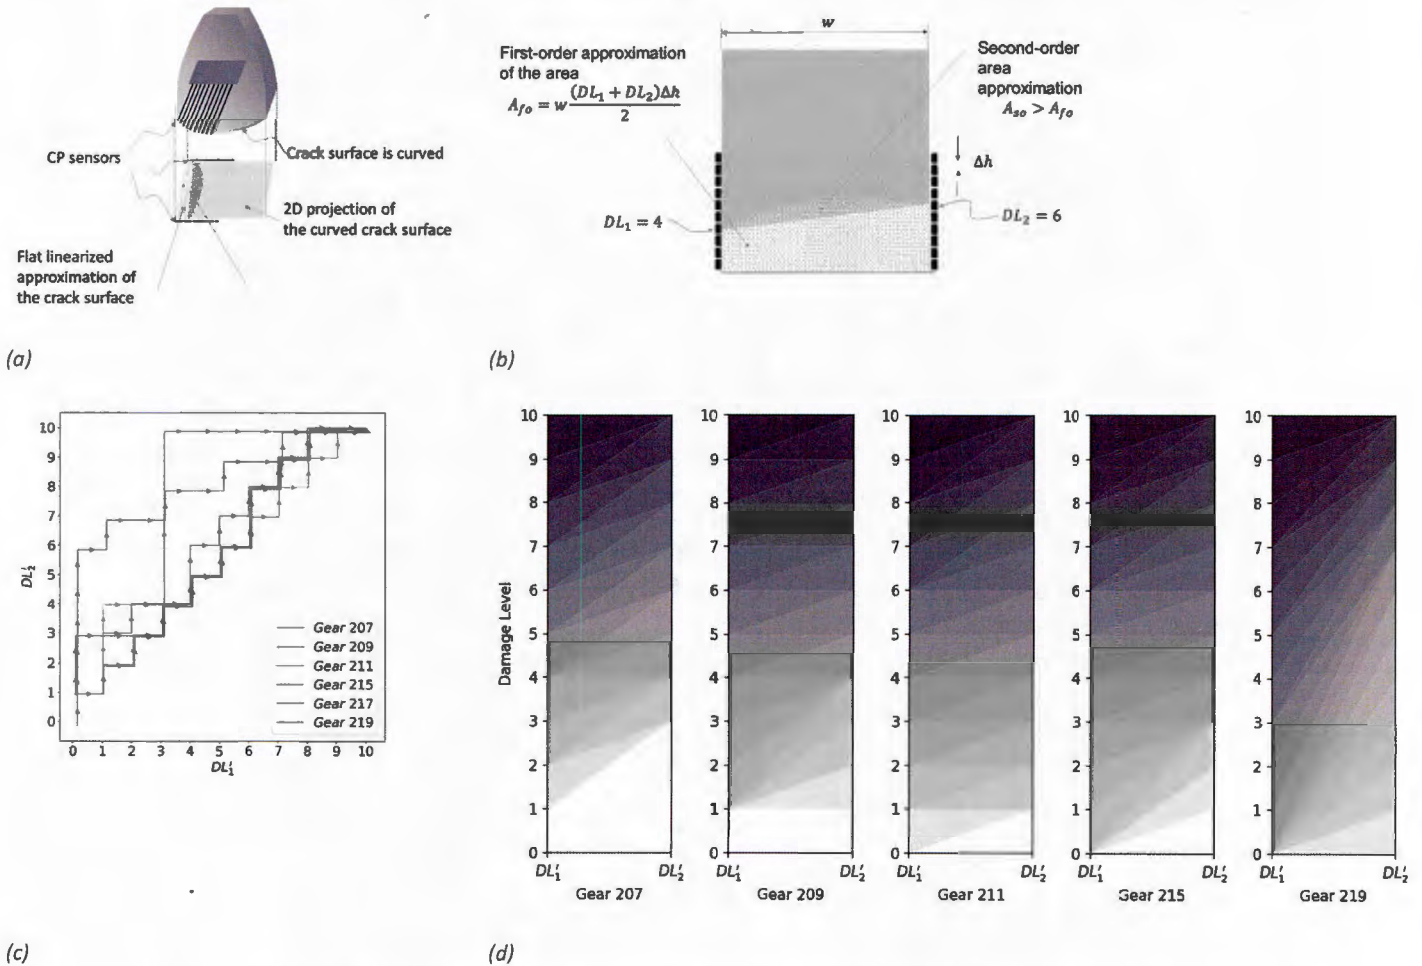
State of damage (a) cracked gear tooth instrumented with CP sensors with surface crack projected on a plane (b) estimation of the area of the crack projection (c) state of damage of gears as measured by cracked surfaces
